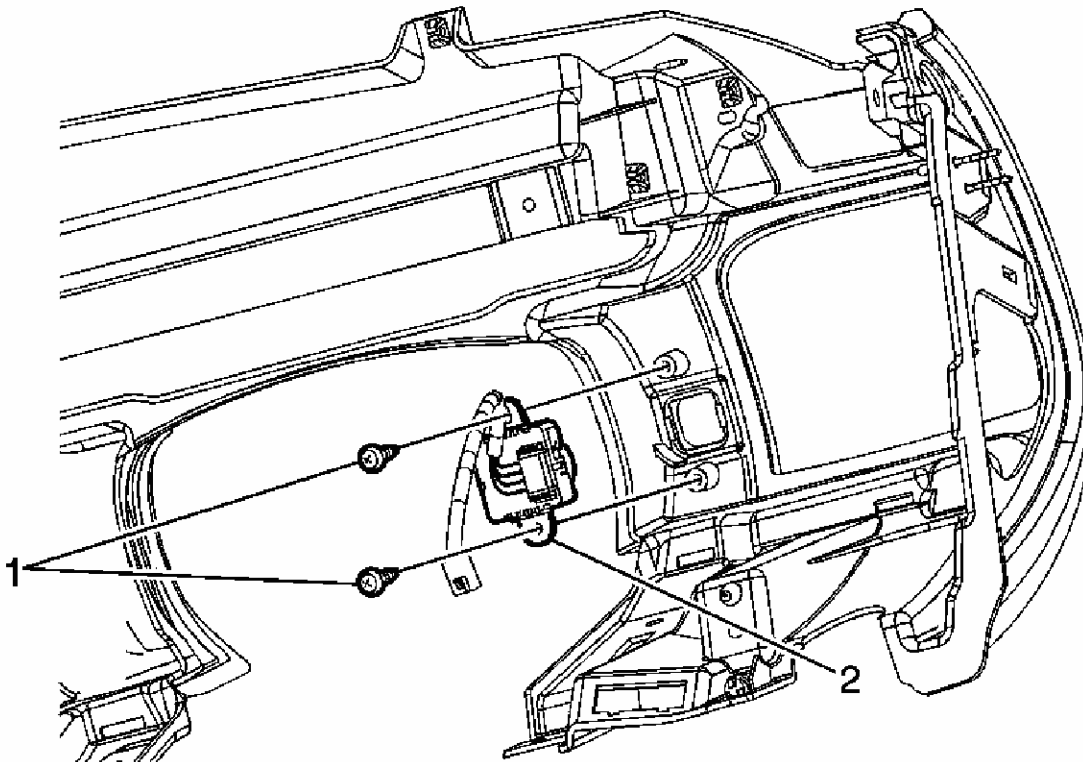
Removing/Installing Inside Air Temperature Sensor Assembly
